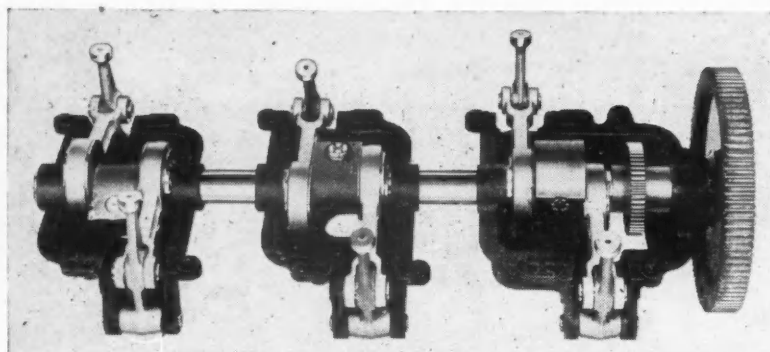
Intake valve shaft assembly with oil pump driving gear.
